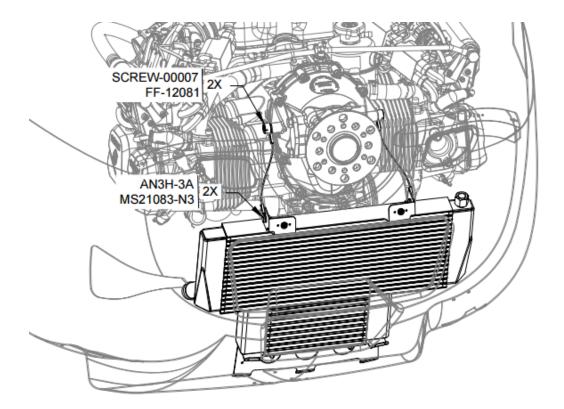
Attach Radiator and Cooler to the Engine with FF-12081
